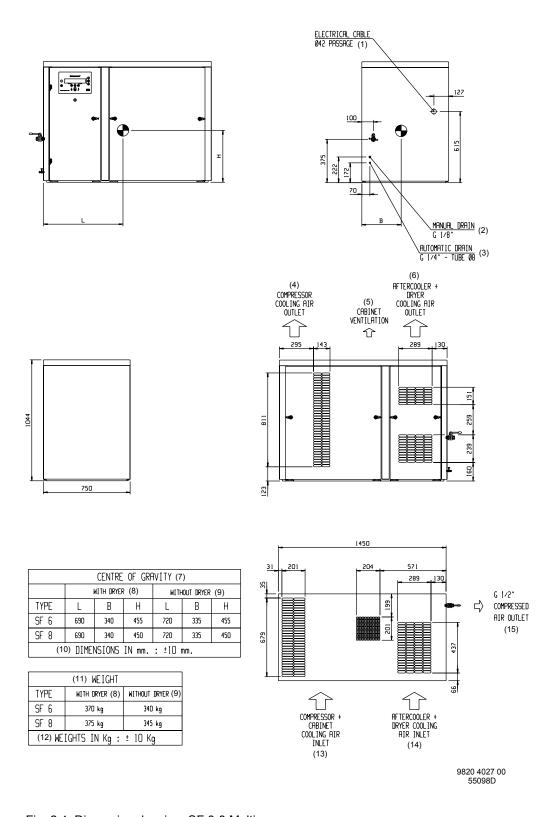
Dimension drawing, SF 6-8 Multi
